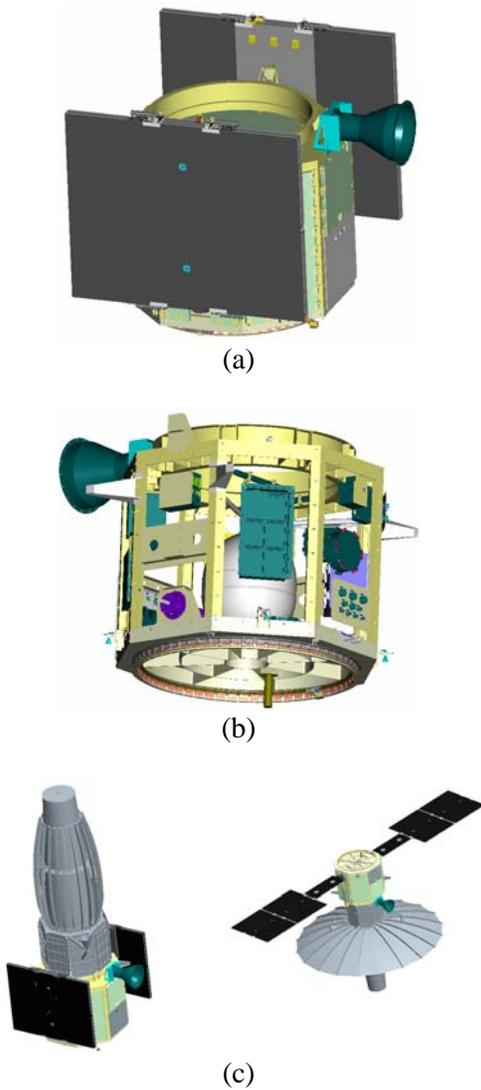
Prototype ORS Spacecraft Configuration: (a) and (b) Spacecraft Bus Component Layout; (c) Space vehicle configuration, stowed and deployed
